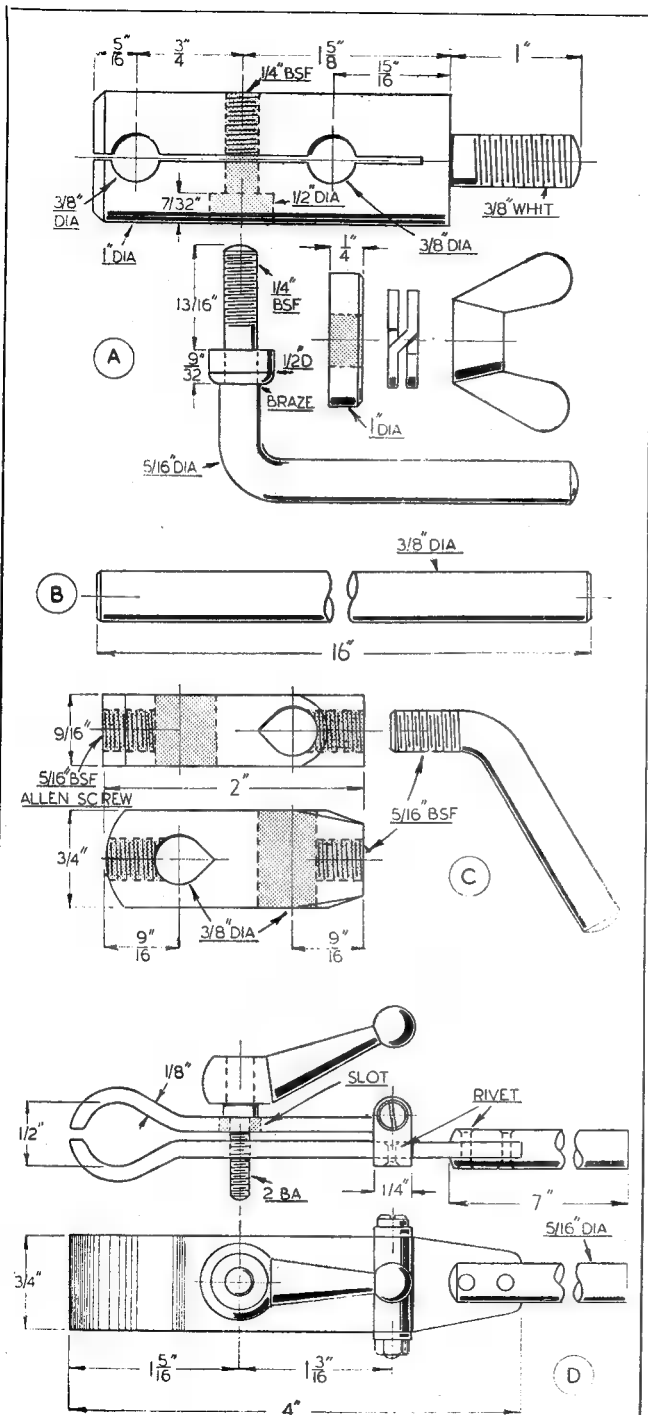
Details of the clamping device. Parts "A," "B," "C" and "D"
